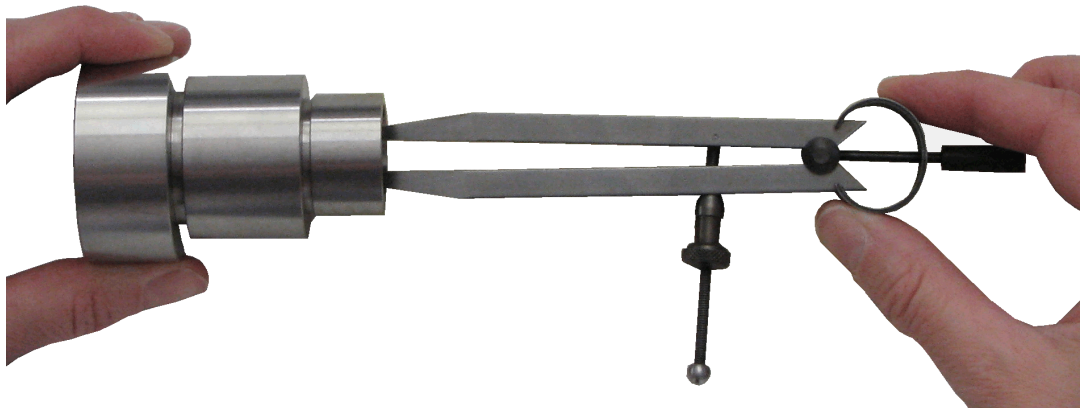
Checking the roundness of a hole with the inside spring calliper
